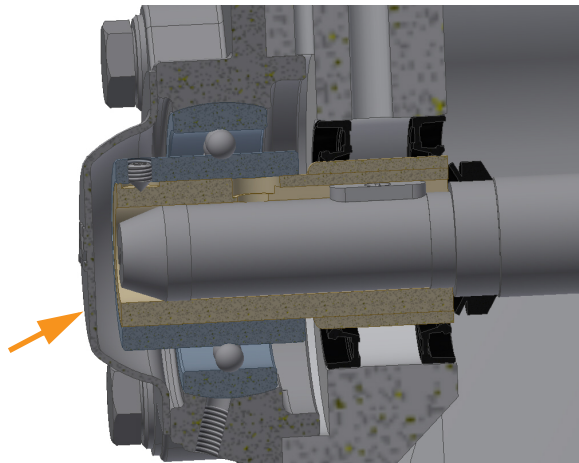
Installing protective cover on bearing housing (similar to illustration)
